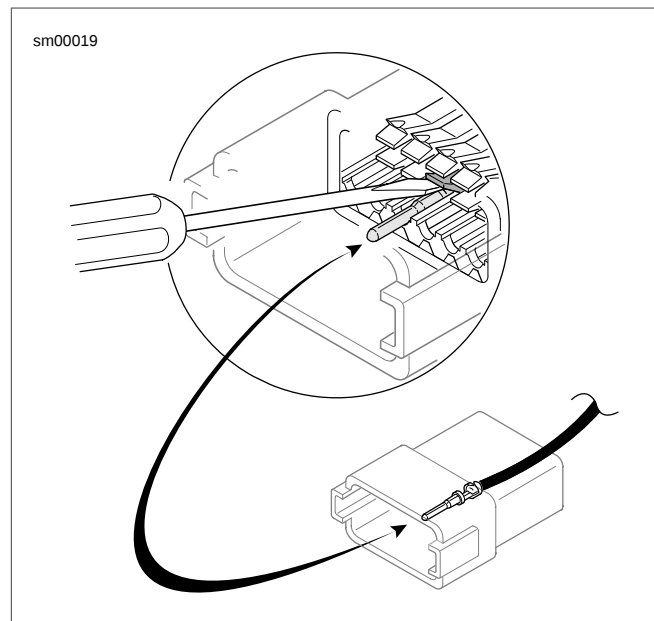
Deutsch DT Sealed Connector: Press Terminal Latch and Back Out Pin
